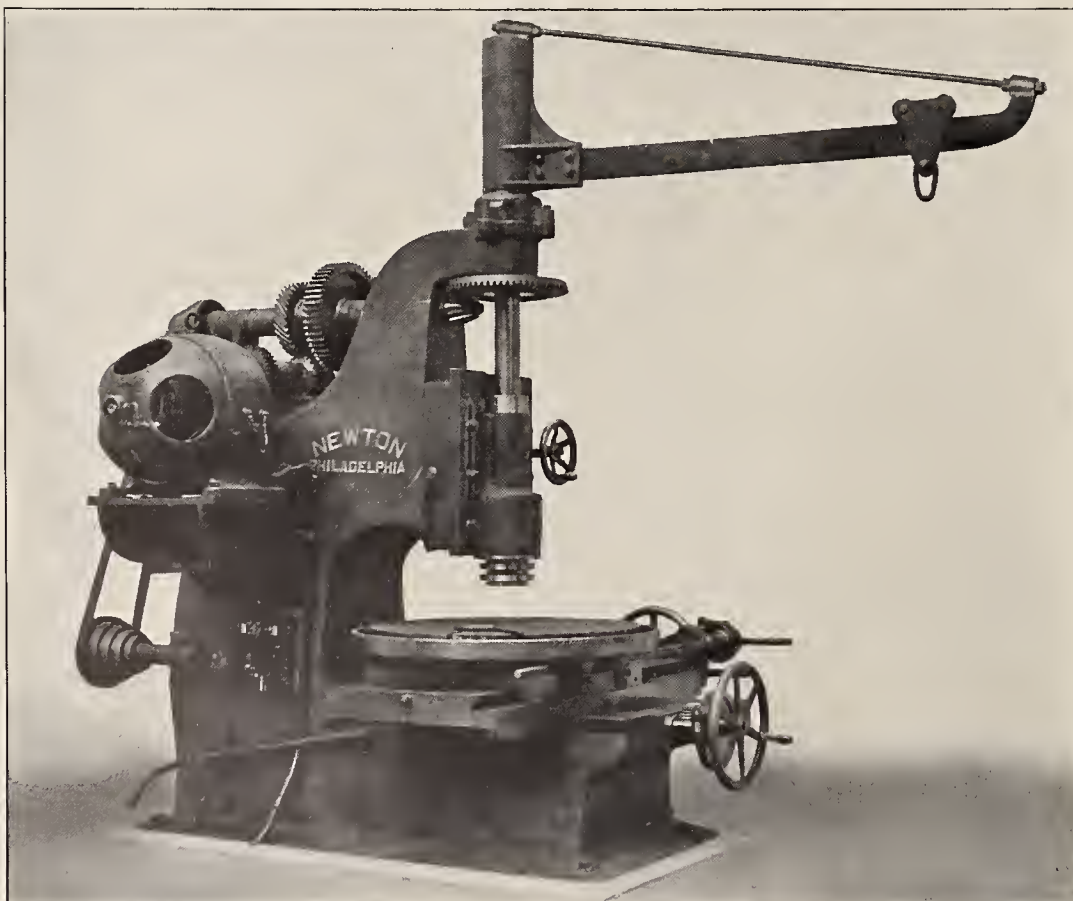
A VERTICAL MILLING MACHINE BUILT BY THE NEWTON MACHINE TOOL WORKS, PHILADELPHIA, PA., DRIVEN BY A VARIABLE-SPEED MOTOR WITH MECHANICAL SPEED CONTROL
